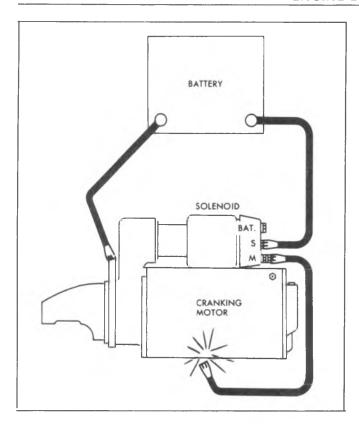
D-25S--Circuit for Checking Pinion Clearance
